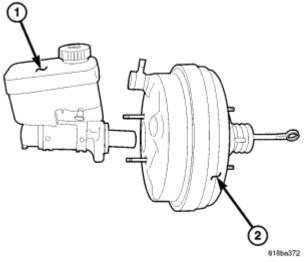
Brake Master/Booster Assembly Courtesy of CHRYSLER LLC
